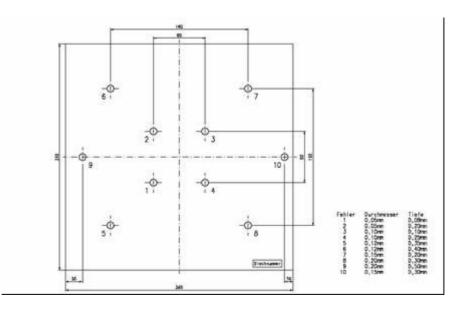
Drawing of niobium sheet with imbedded defects
